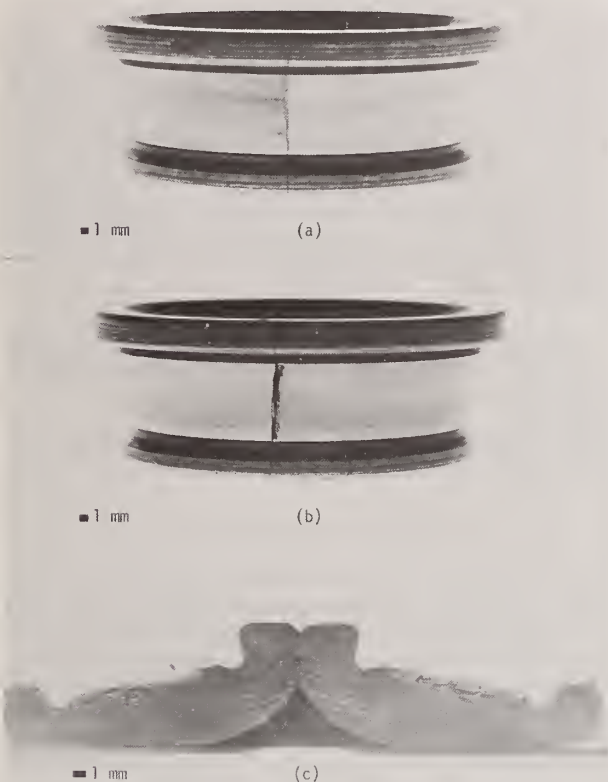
Transverse cracking damage on tapered roller bearings made of through hardening steel.
